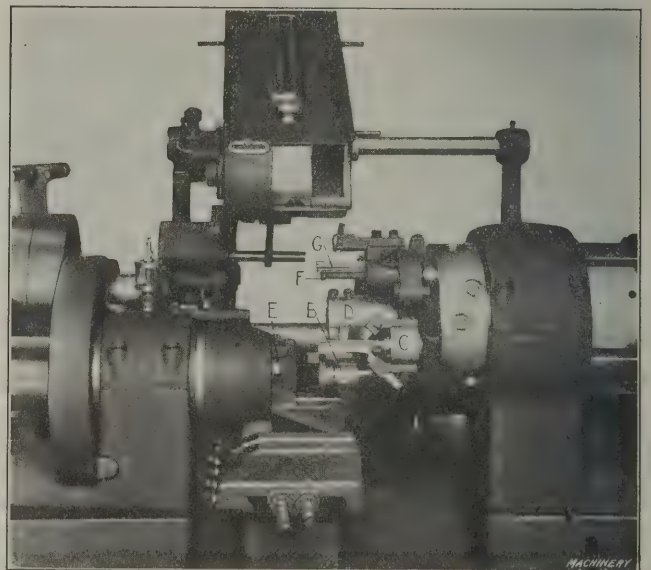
Conveyor in Position to insert Rough Casting in Chuck
